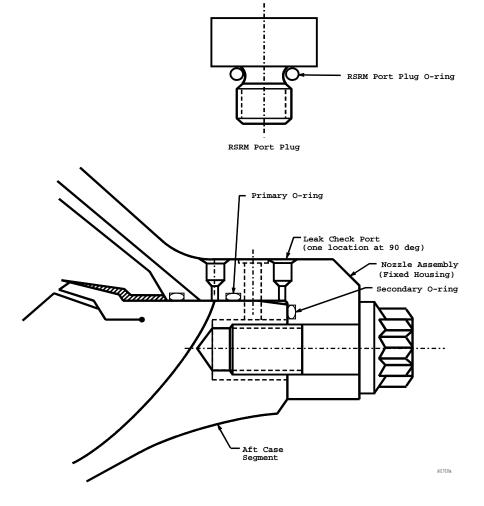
Case-to-Nozzle Joint, Leak Check Port, and RSRM Port Plug
